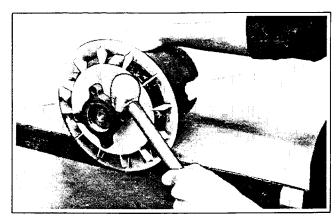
Removing Stub Shaft — 7.5C & 7.5R
